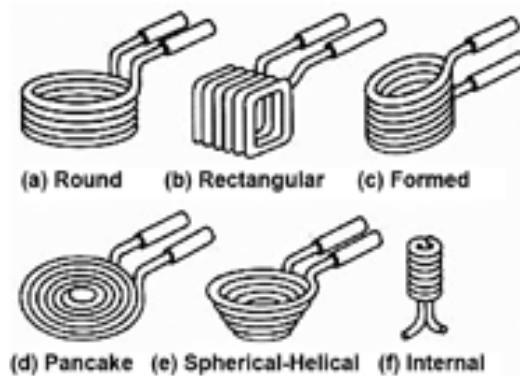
Multiterminal coils designed for heating parts of various shapes: (a) round; (b) rectangular; (c) formed; (d) pancake; (e) spiral-helical; (f) internal [33]
